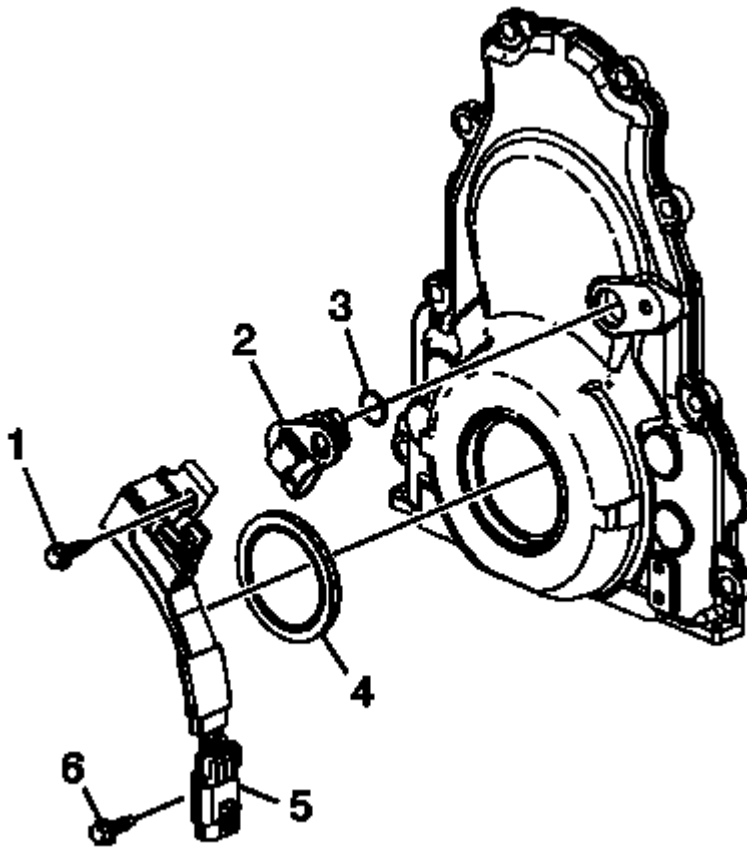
View Of Front Cover, Oil Seal, Camshaft Position Sensor, Bracket & O Ring
